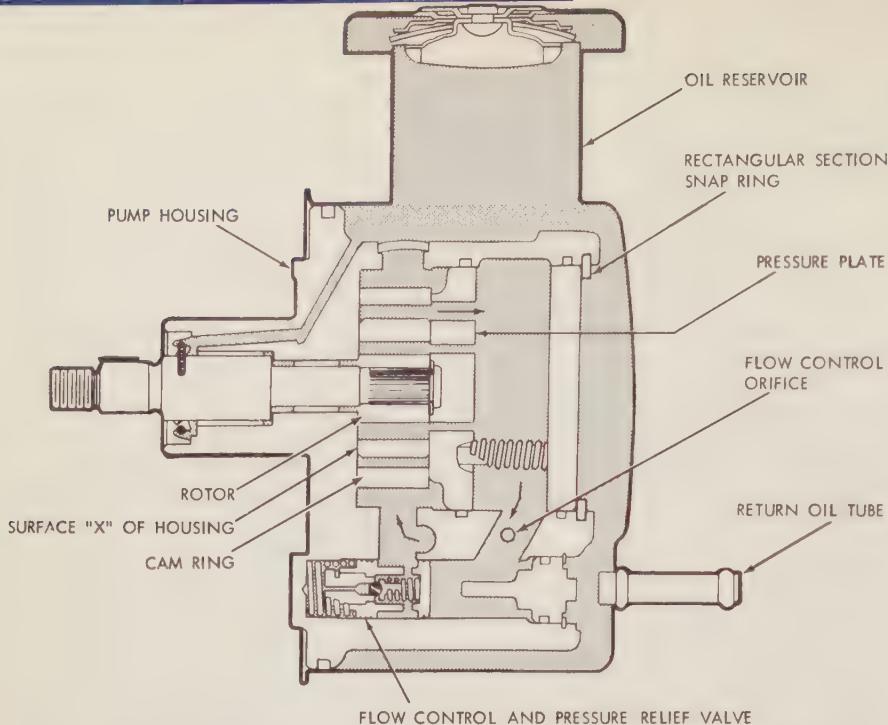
This pump was the initial version built to meet the design objectives of the 1959, pulley driven, high performance pump. The one-piece housing permitted most of the machining and assembling to be done from one end. Compared to previous model pulley driven pumps (Figs. 2 and 4), this pump was considerably more compact which meant fewer installation problems. The number of high pressure leakage points was reduced to one by surrounding the pump with its reservoir. A flow control system (explained in Fig. 6) that allowed the external pump flow to drop off at higher speeds was incorporated in the design. This pump was capable of delivering 1.75 gpm at engine idle with pressure reliefs as high as 1,300 psi. After evaluation of this design, an improved version was developed which was used in 1959 cars.
